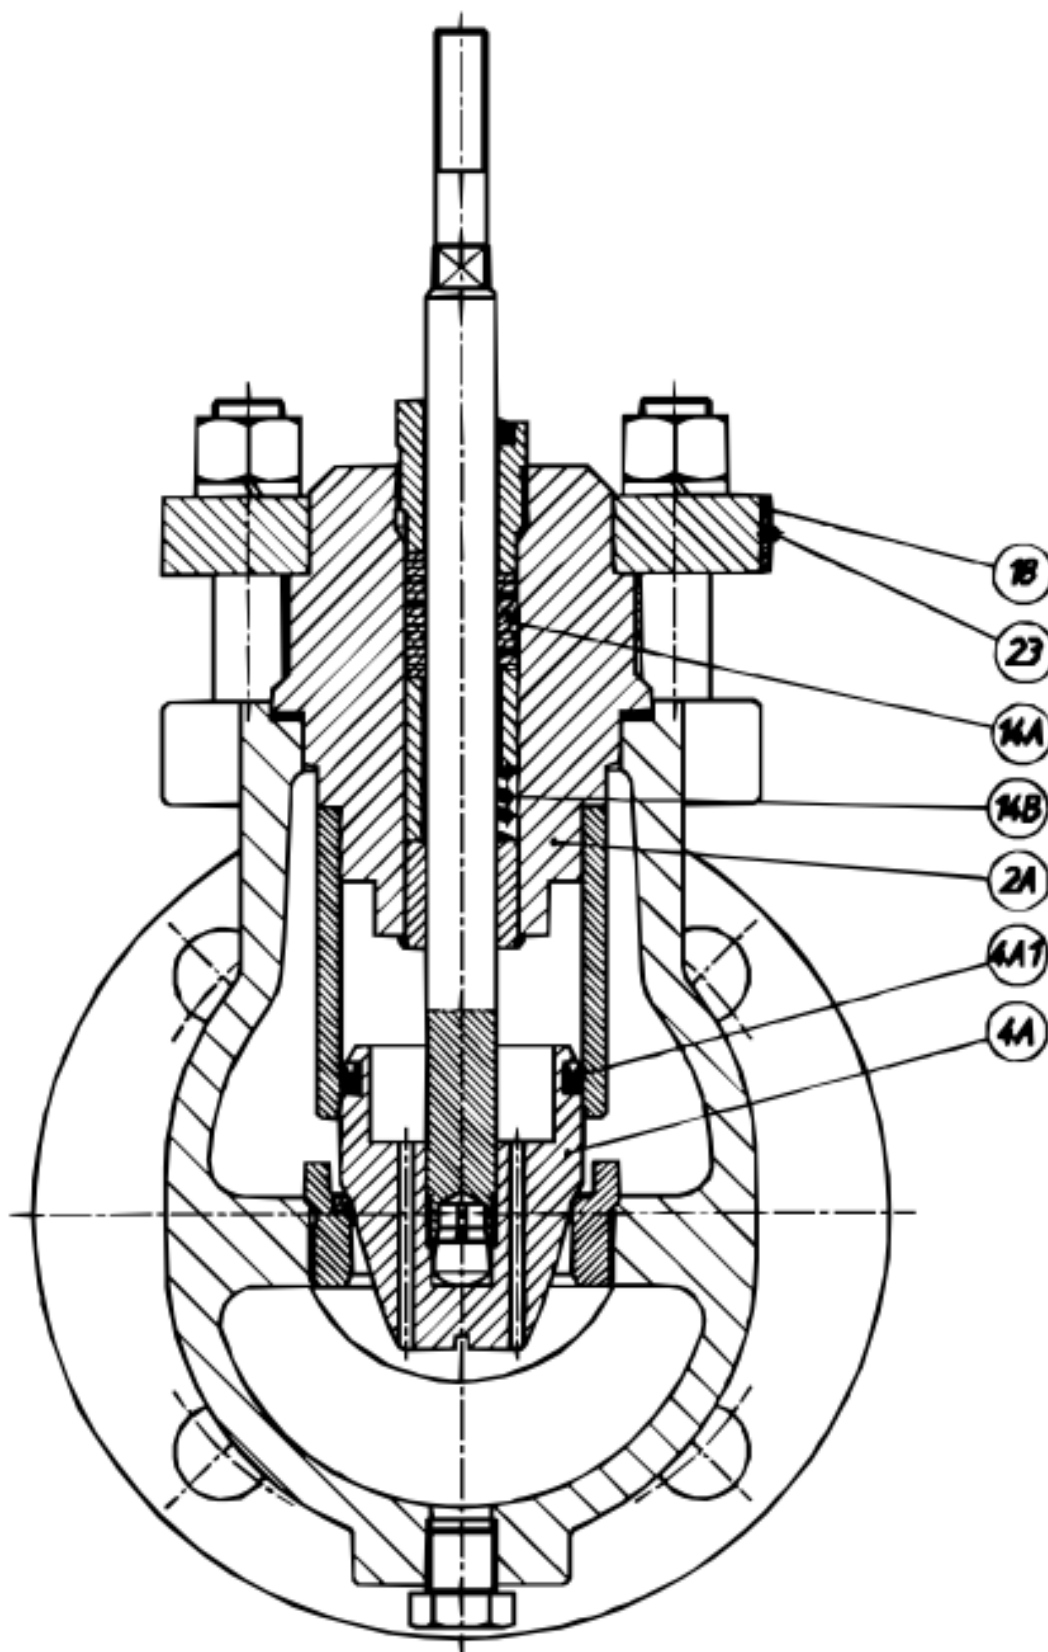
Regulator valve DN 40... 100 with pressure-balanced block
